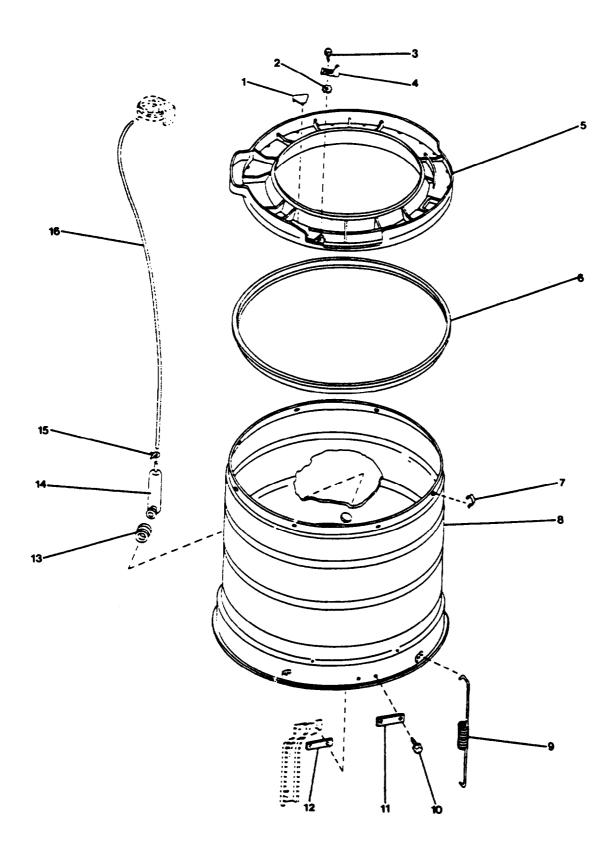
Washer Machine Outer Tub. Cover. and Pressure Hose Group.
